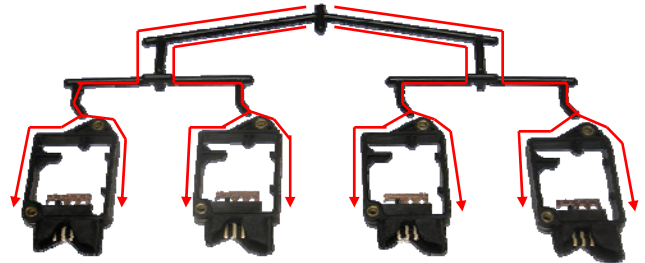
Uniform filling pattern and dimensional results between all 4 cavities achieved through MeltFlipper melt-management technology.
